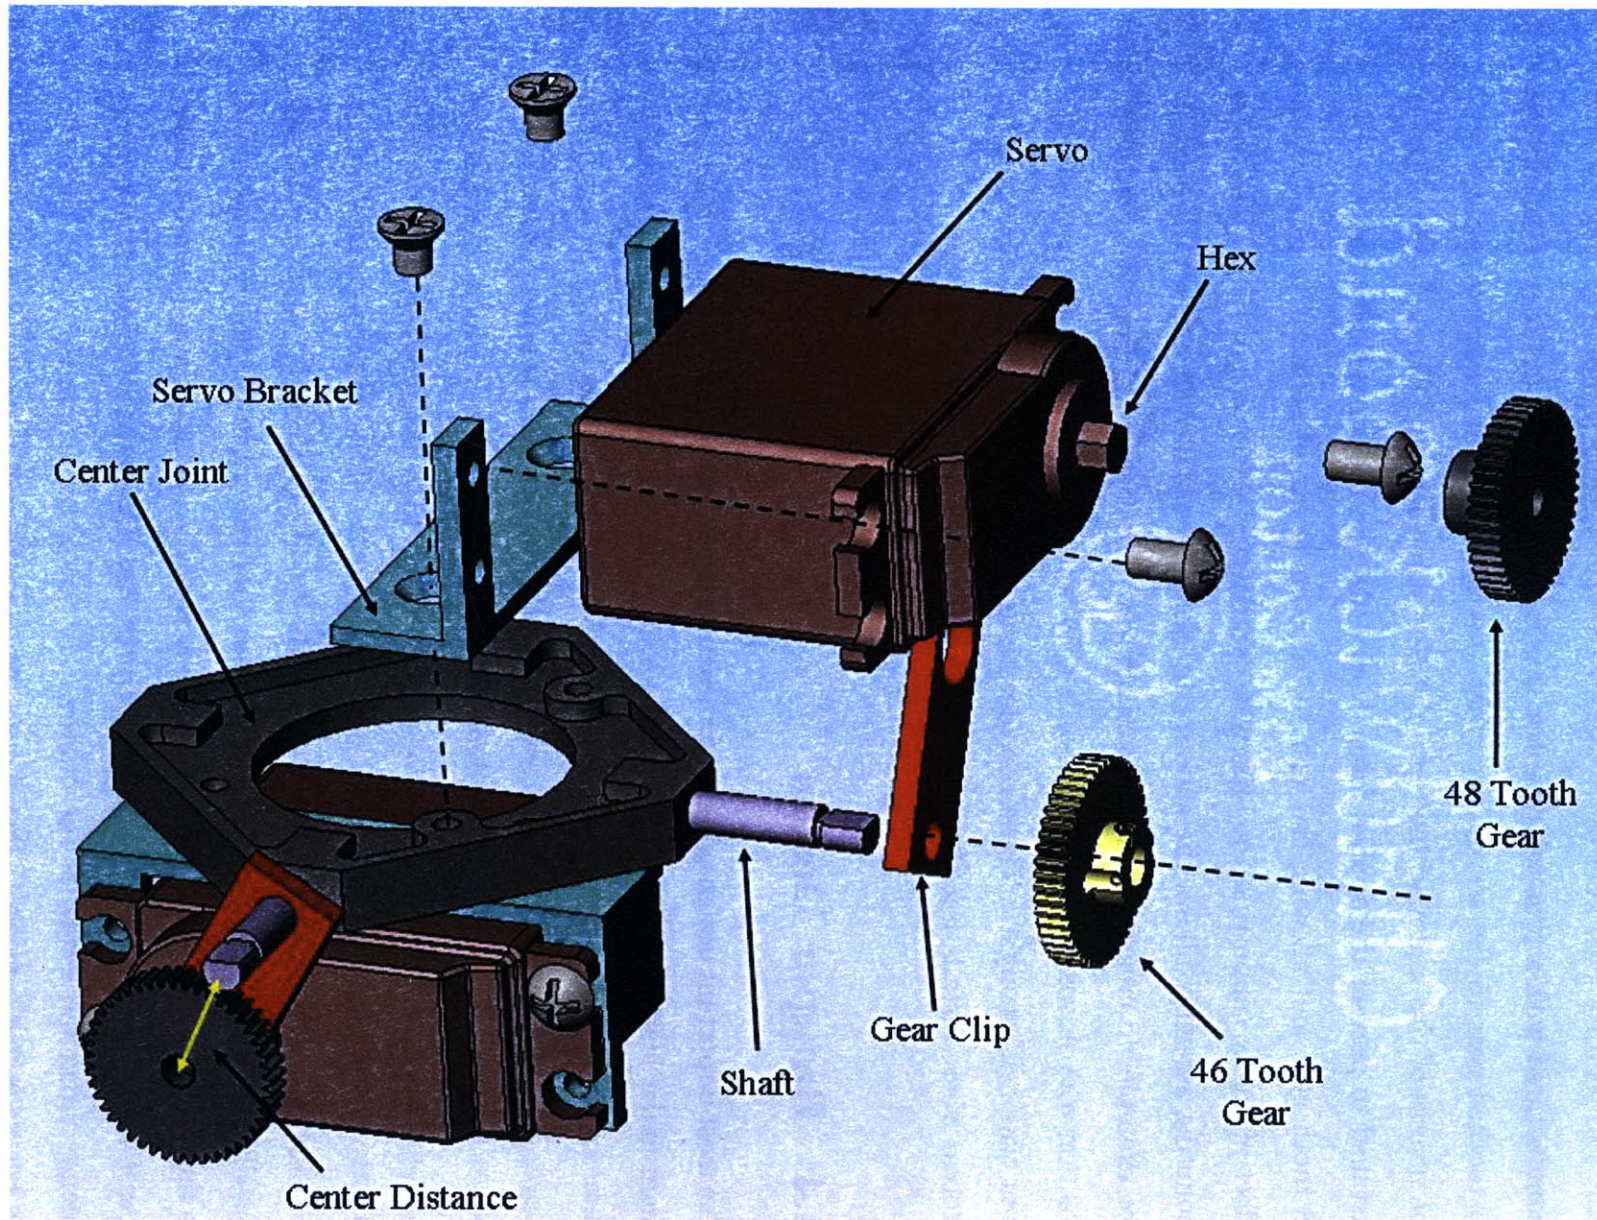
Exploded view of the revised servo mounting assembly with a gear drive system instead of a belt-pulley system.
